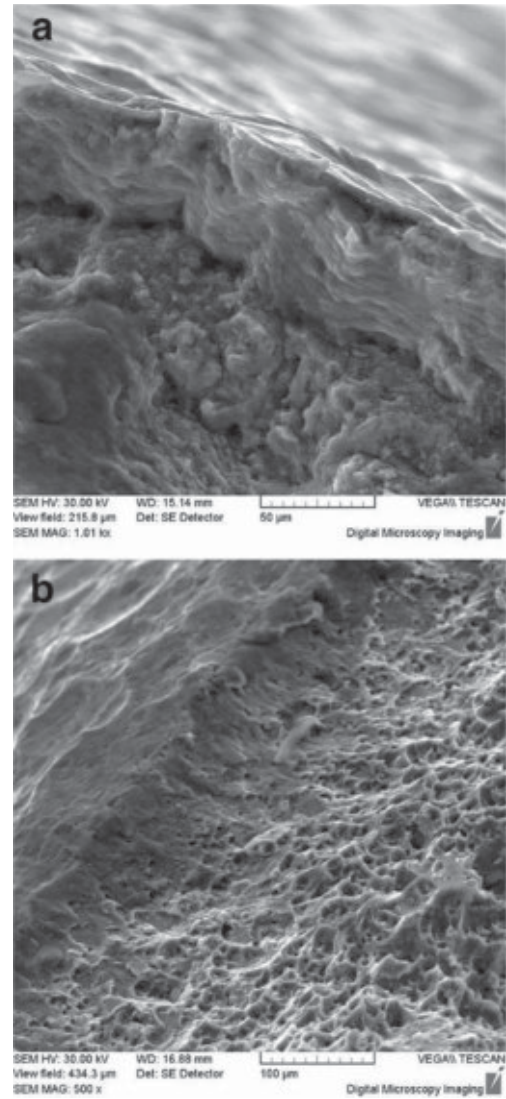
Surface fatigue crack initiation in SP specimens (a) and change of the crack path by the shot peening surface topography (b)
